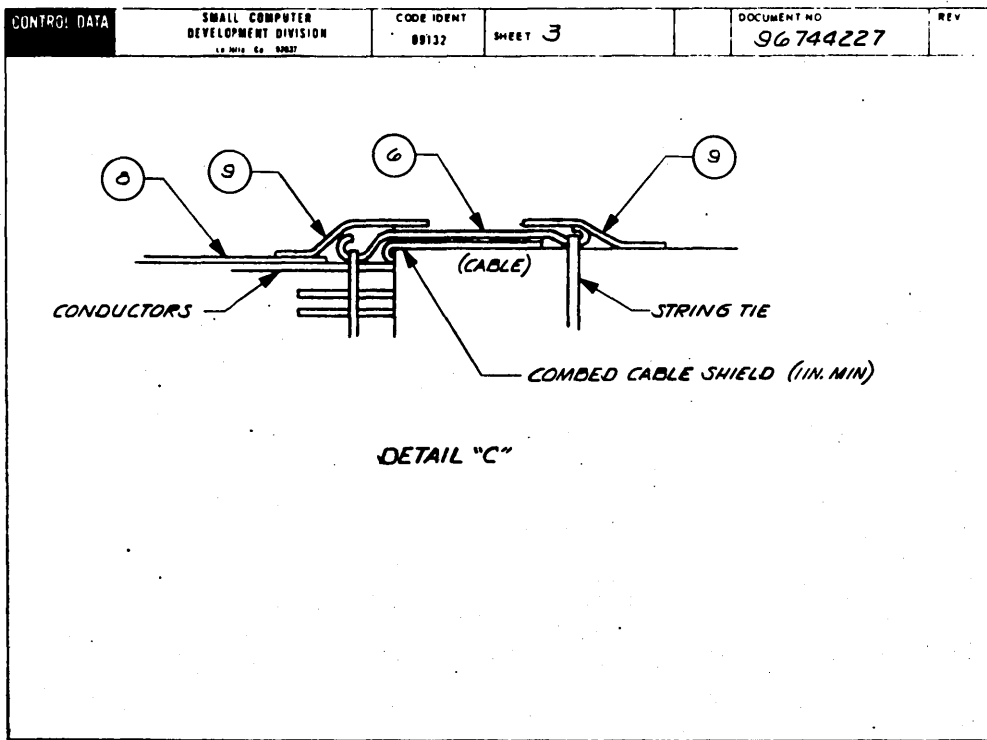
Cable Assembly - Bus Out Expansion (Sheet 1 of 4)
